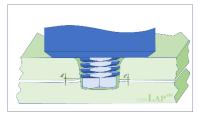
Pentagonal tool for disrupting the oxide layer during lap welding^{[4][5]}
